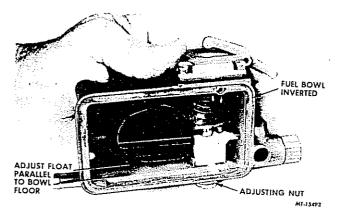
PRELIMINARY FLOAT ADJUSTMENT EXTERNALLY ADJUSTABLE FUEL INLET VALVE — INTERNALLY ADJUSTED FUEL INLET IS SIMILAR
